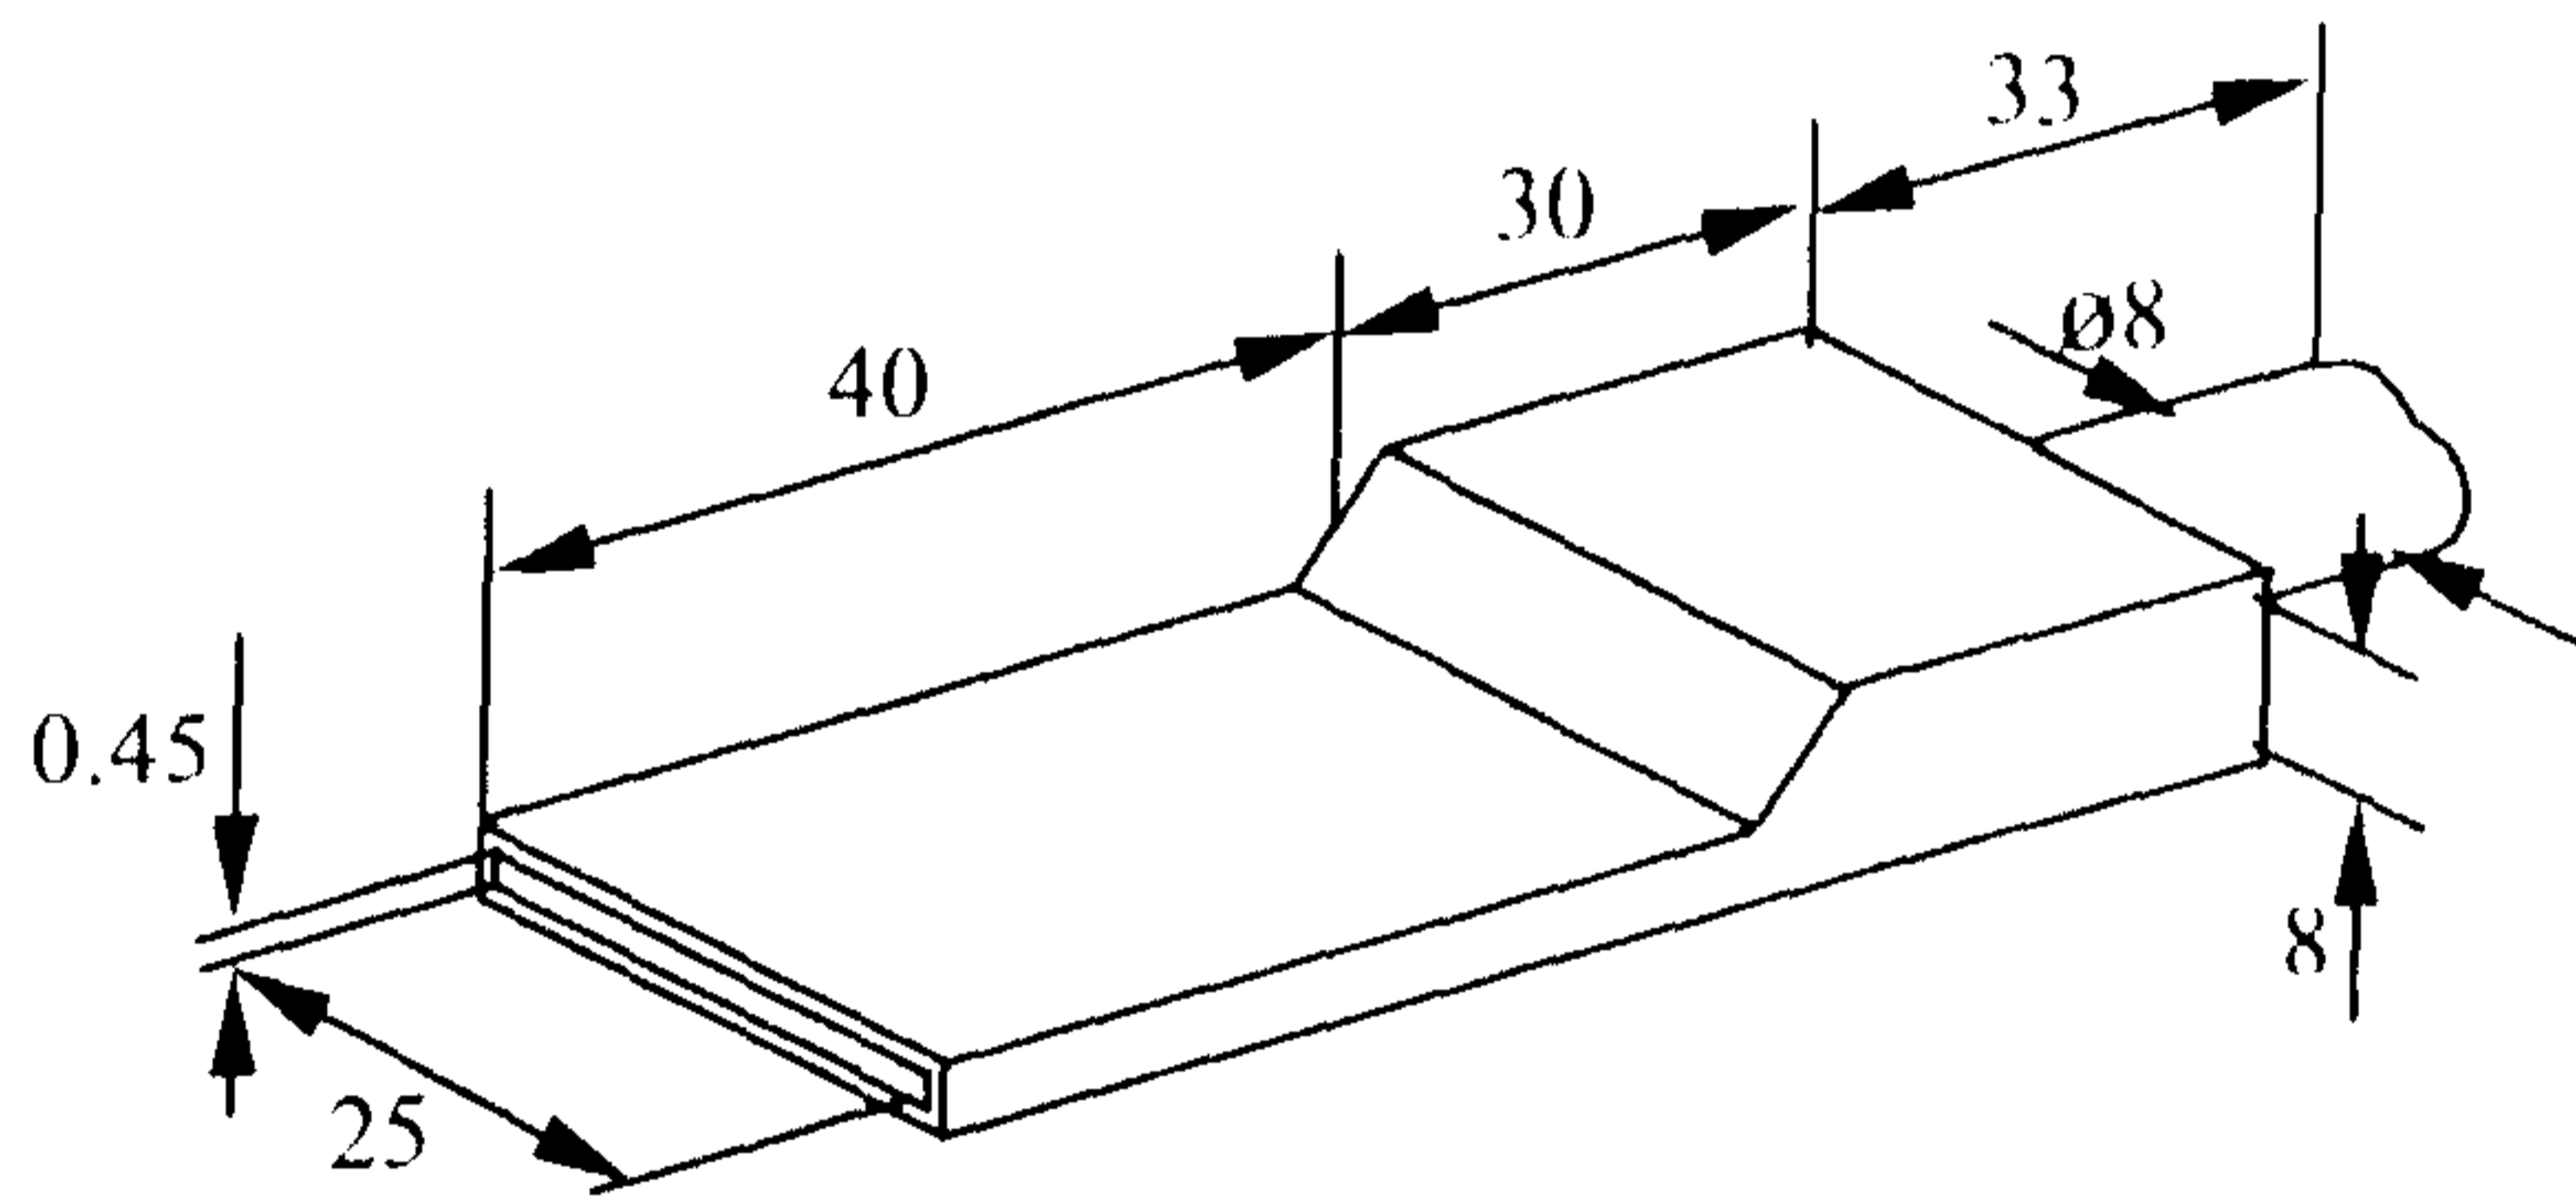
Schematic drawing of the nozzle with long slot and rectangular outlet gap.
